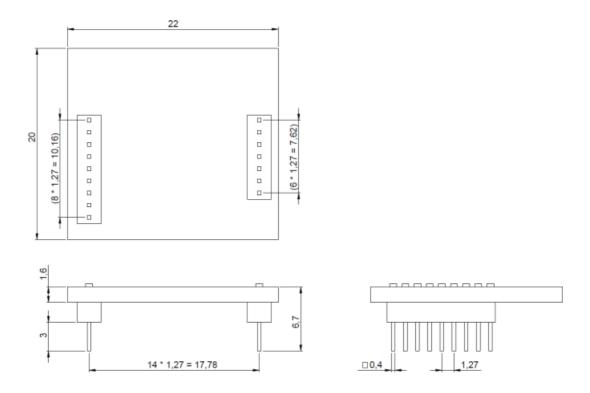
Multi-sensor Shuttle Board 3.0 dimensions
